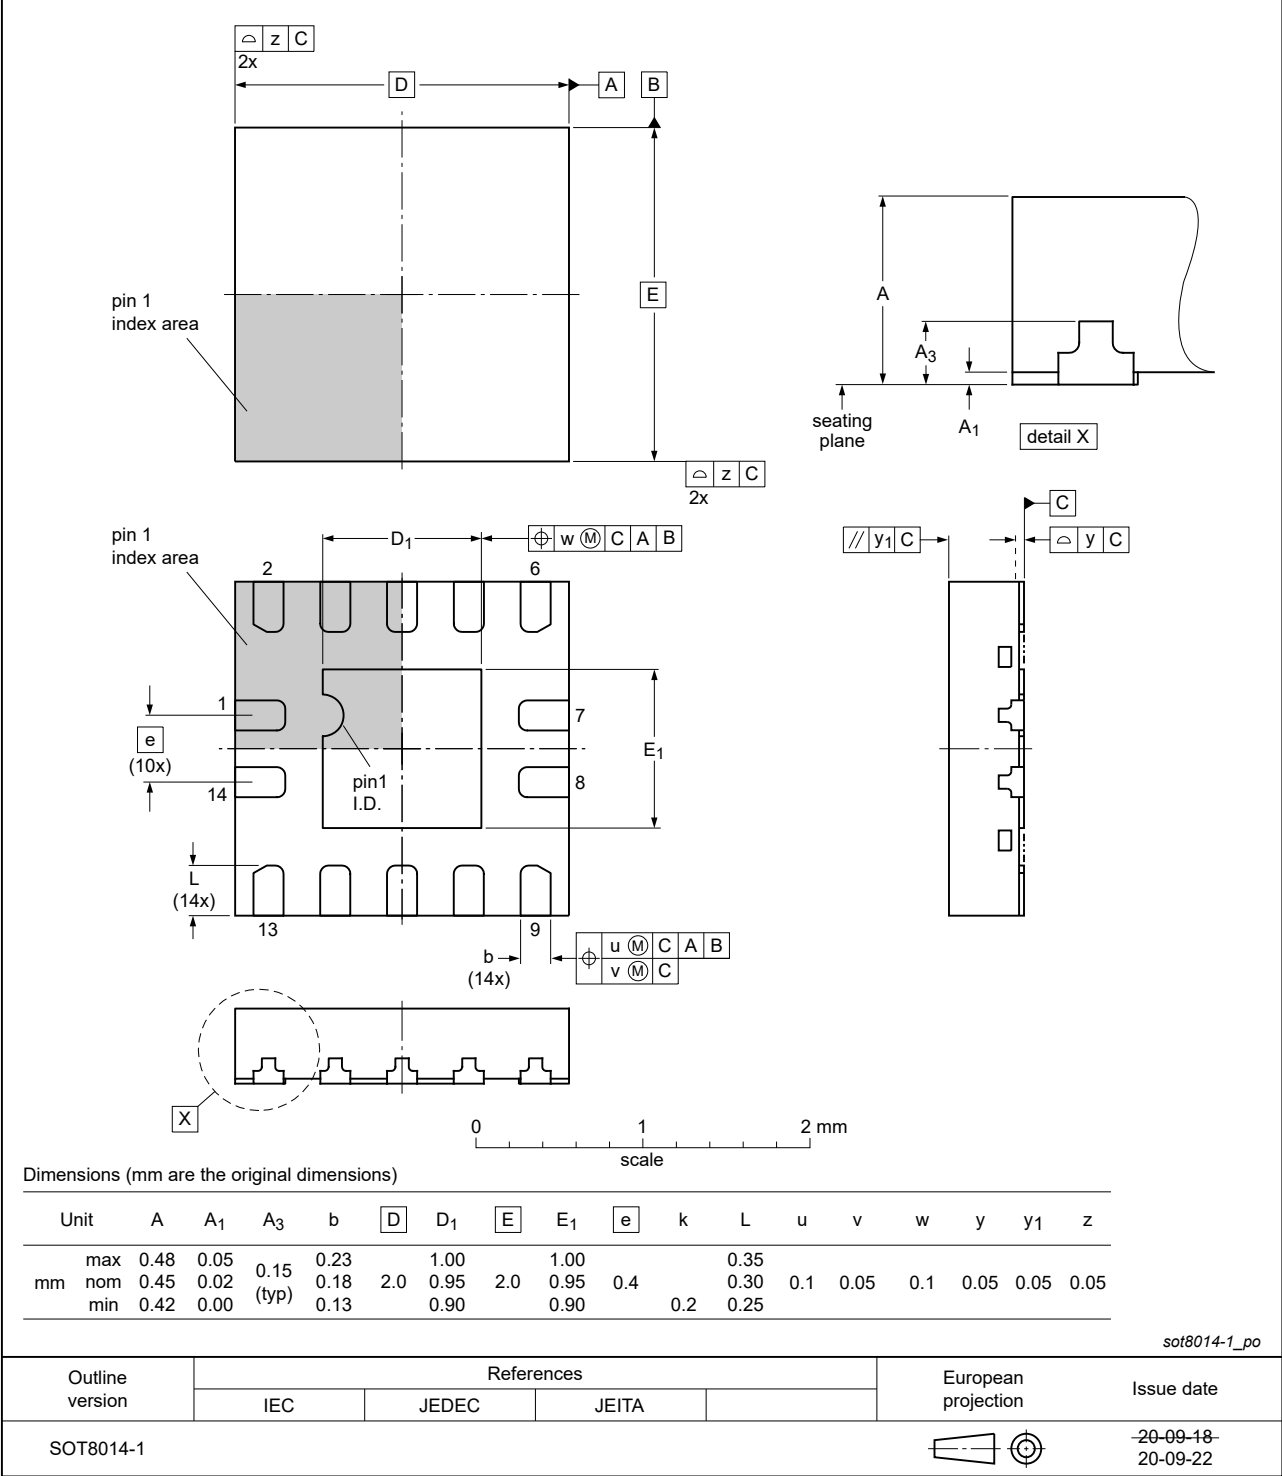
Package outline SOT8014-1 (DHXQFN14)
